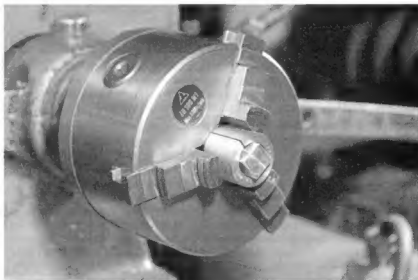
A collet in a 3-jaw lathe chuck holding a length of 12 mm rod.
